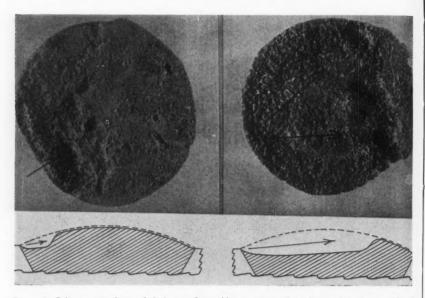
Enlargement of corroded rivet surfaces. Note concentration of corrosion at one side of rivet (left) proceeding fanwise across the rivet point (right).
